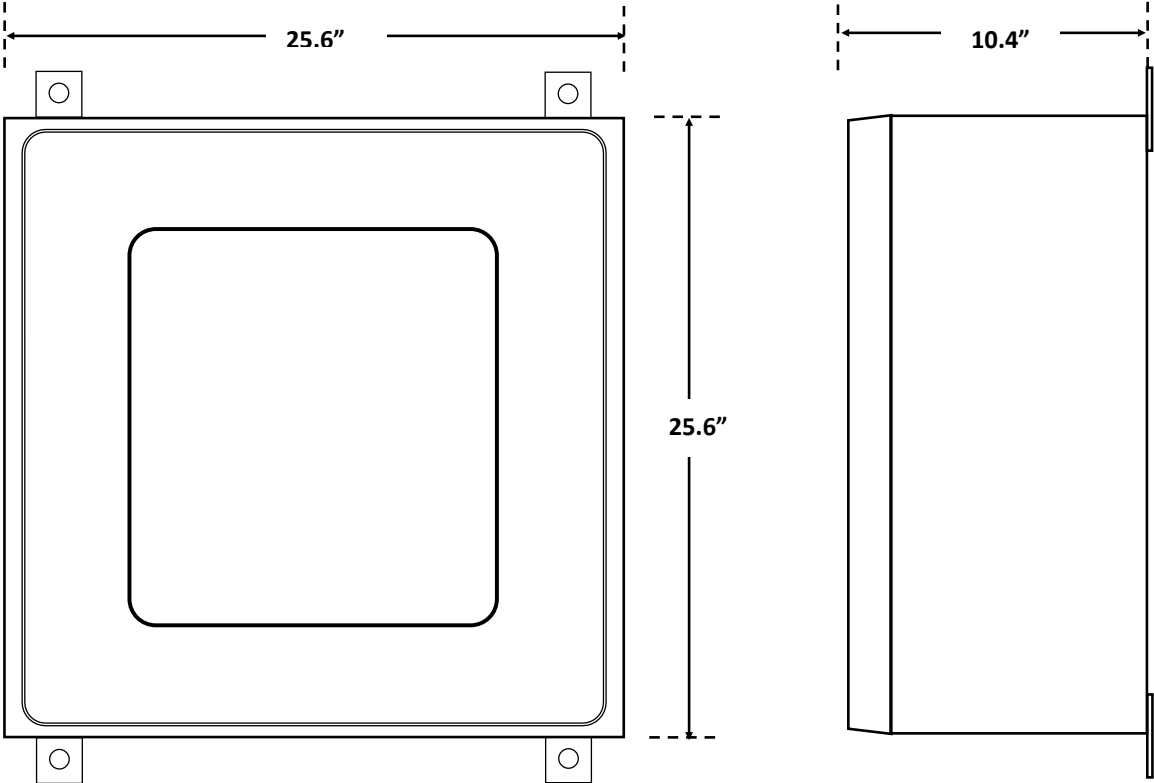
GDS-58DXP Dimensions (GDS-IR Sensor)
